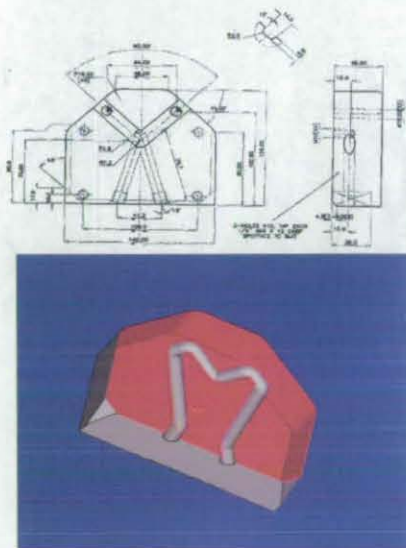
Traditional and Conformal Cooling Channels Designs for Inserts
